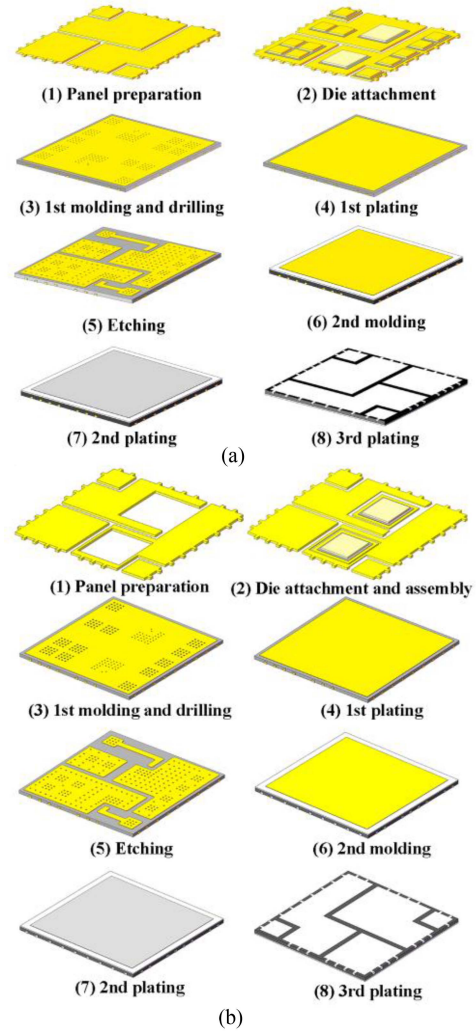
Process flow of PCB embedded packaging cells with panel carrier. (a) Ag adhesive and solder paste. (b) Pressure-assisted sintered copper or silver.
